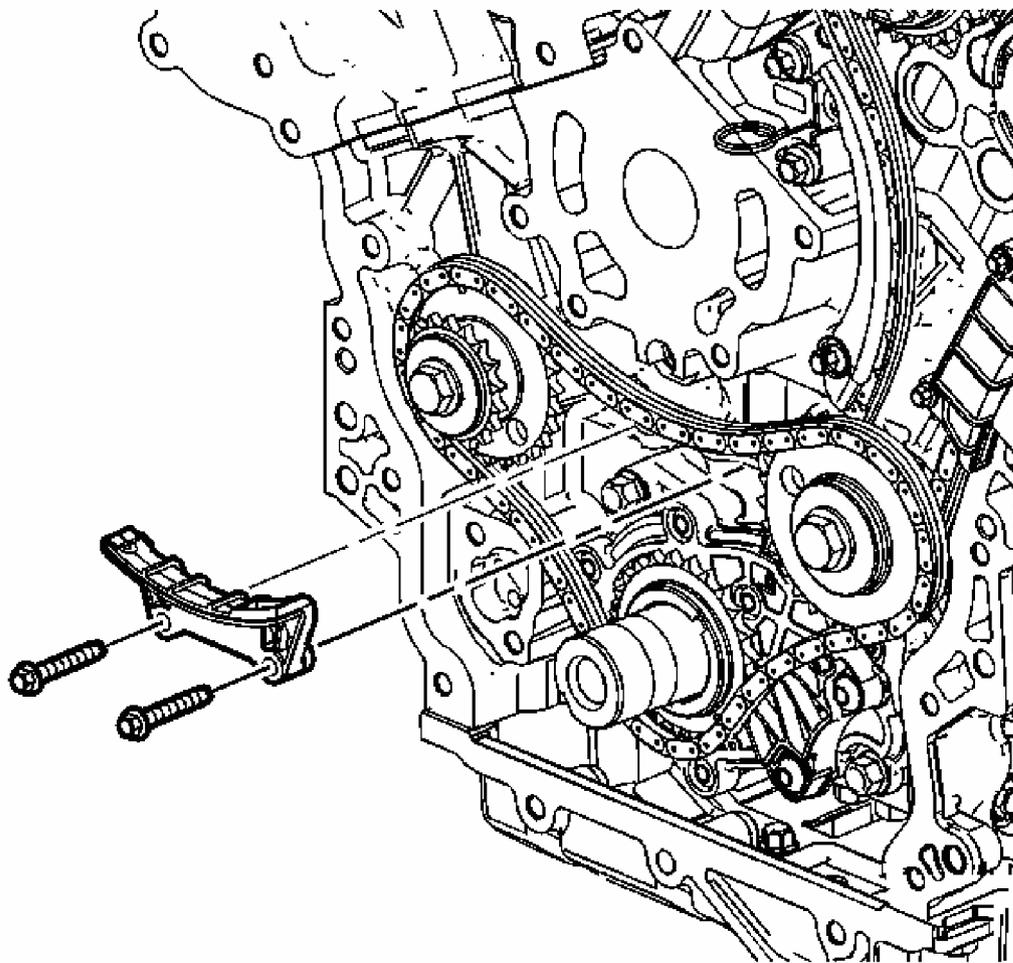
View Of Upper Primary Camshaft Drive Chain Guides
